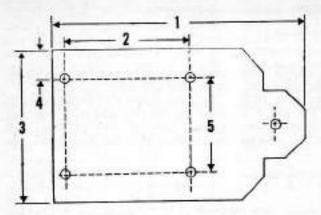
A connector plate must be labricated locally 14-inch thick steel plate to specifications shown and used to split tractors equipped with power shift transmissions.
